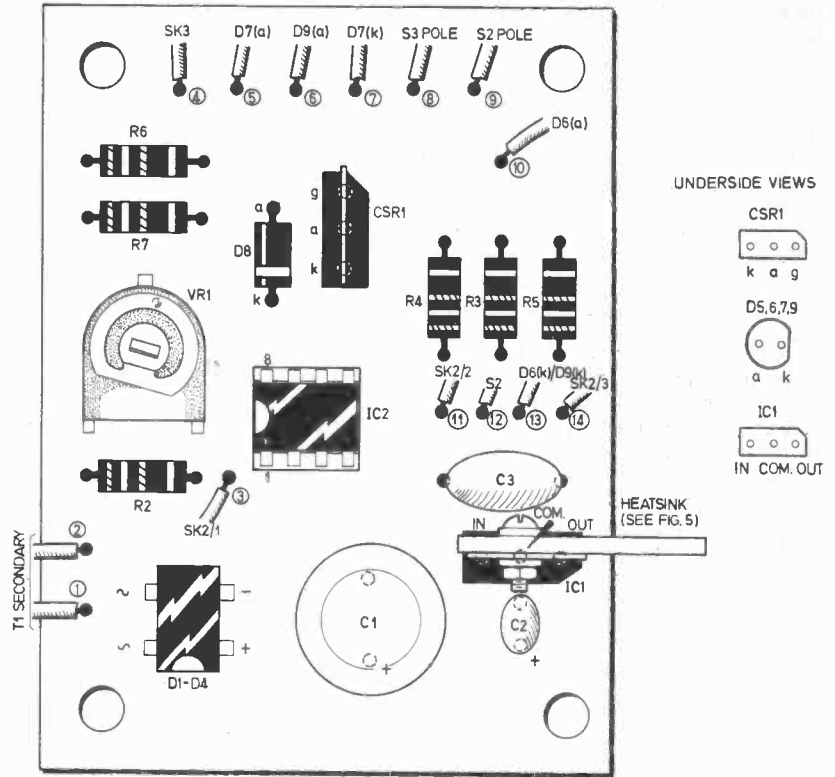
The layout of the components on the top of the p.c.b. and wiring details to off-board components.
